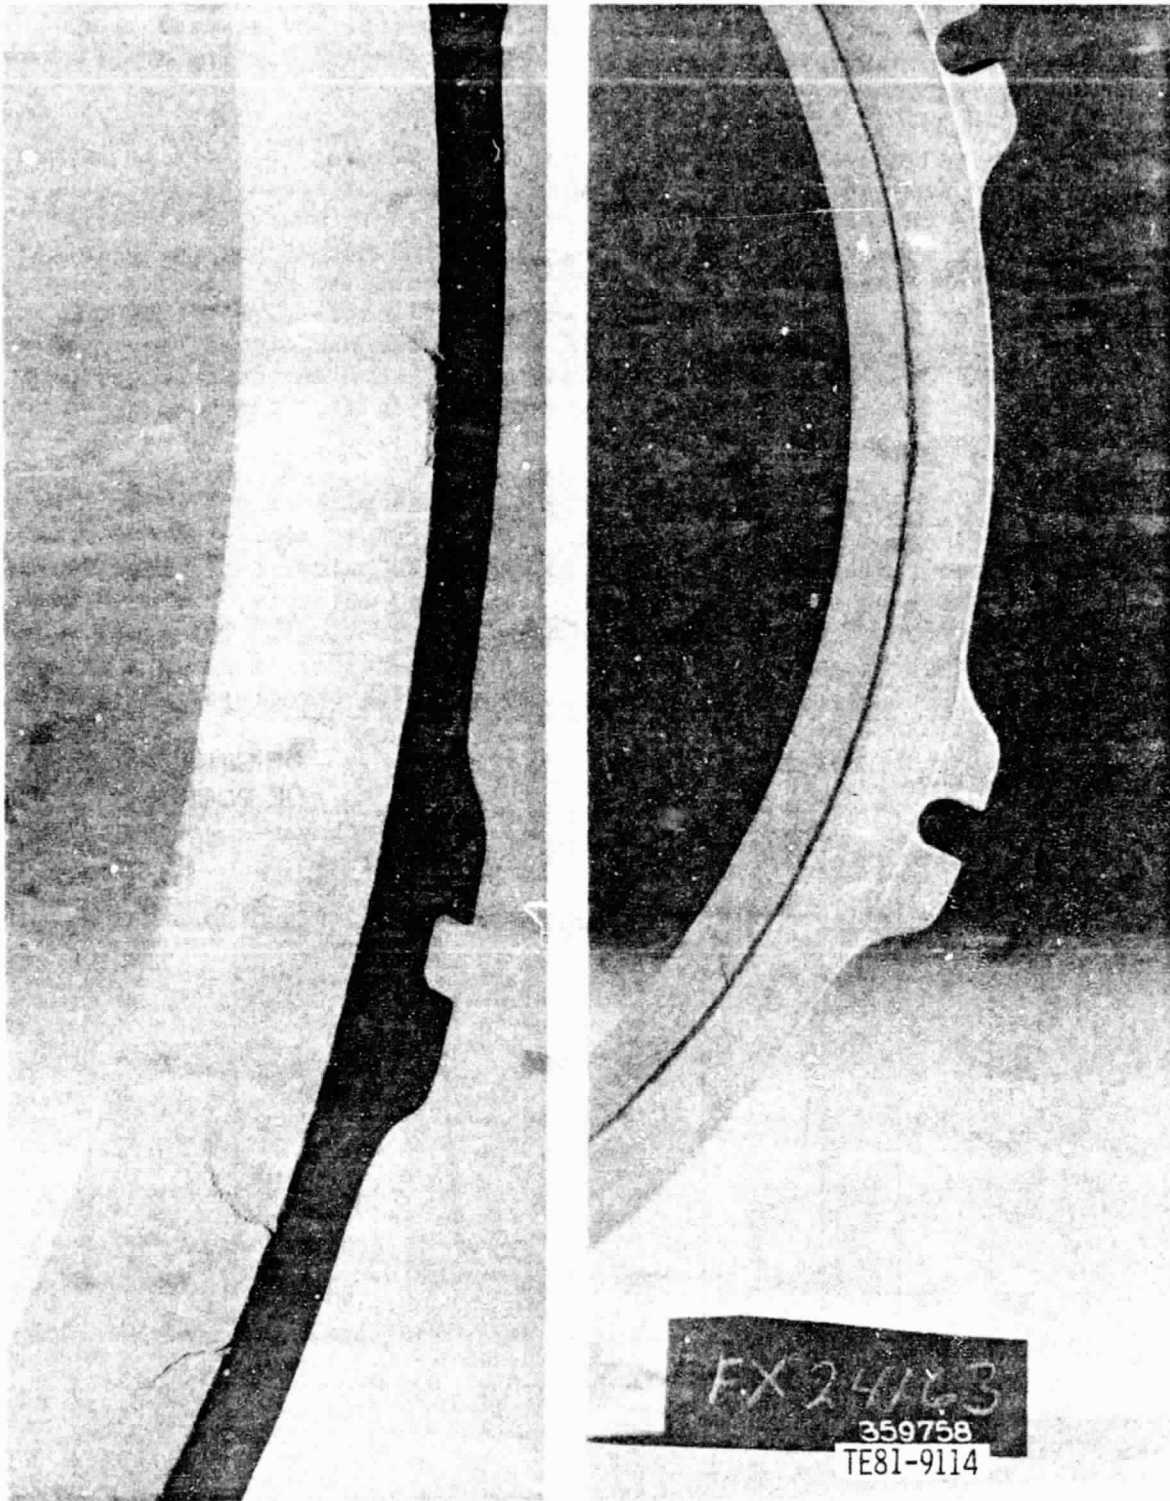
Shroud ring cracks due to improper clamping in green machining.
